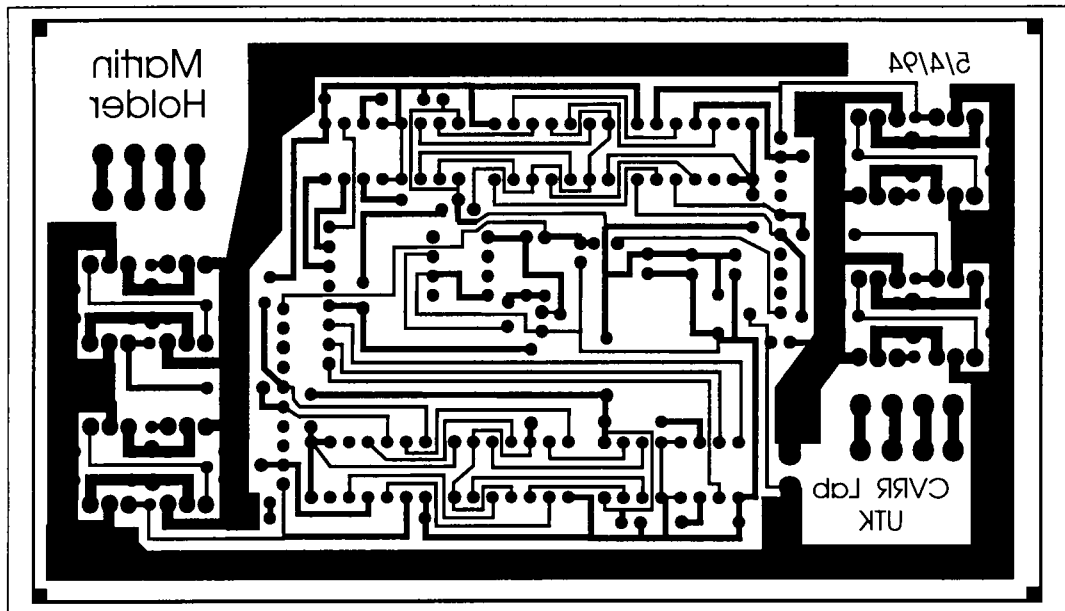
Motor Drive controller's printed circuit board trace layout for controlling two stepper motors.
